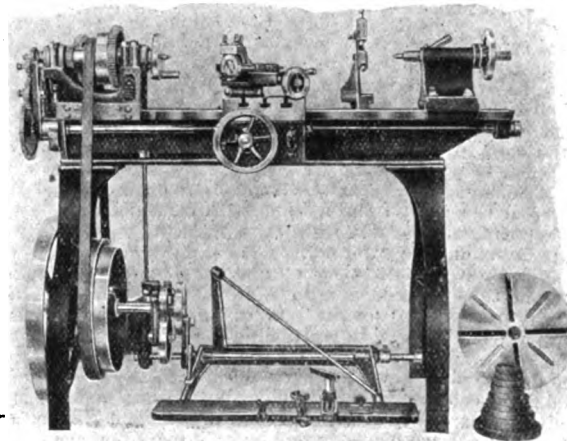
The Drummond 6-in. self-acting, sliding, boring, surfacing, and screw-cutting lathe. (See page 138.)
